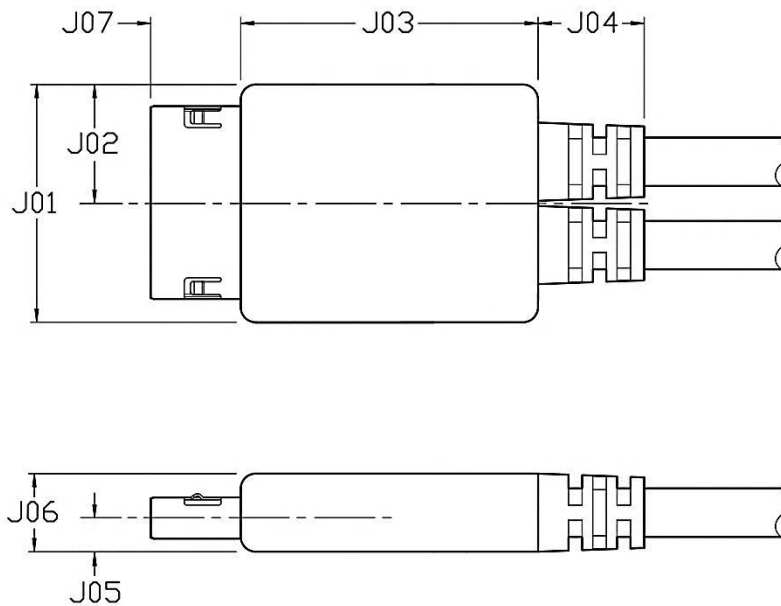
x4 Free External Passive Latch Cable Assembly Form Factor Dimensions
